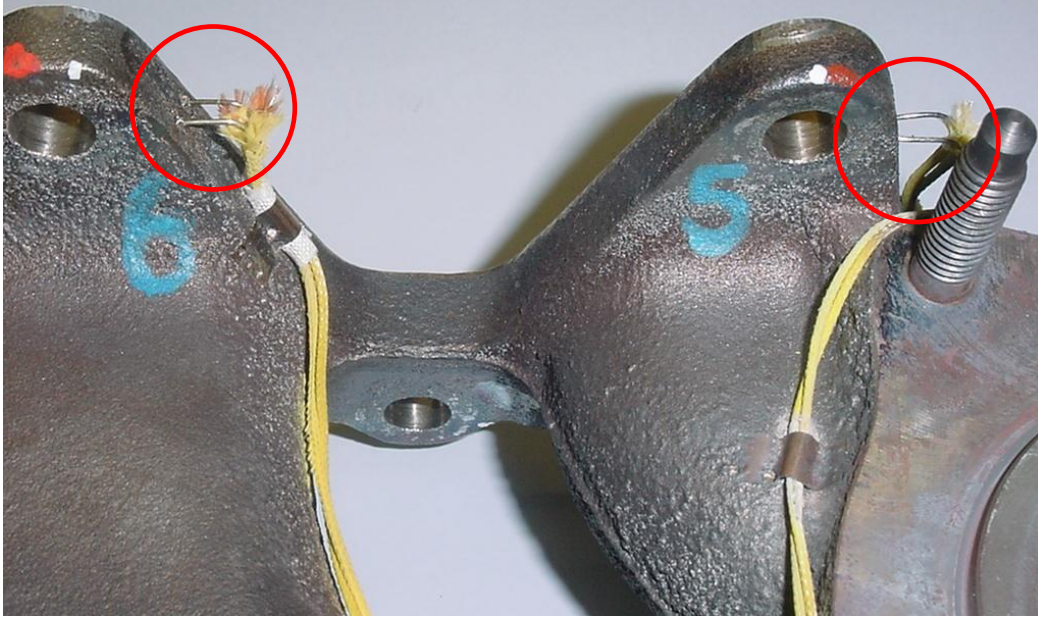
EXHAUST MANIFOLD WITH SURFACE TEMPERATURE INSTRUMENTATION ON HEAD MOUNTING FLANGES
